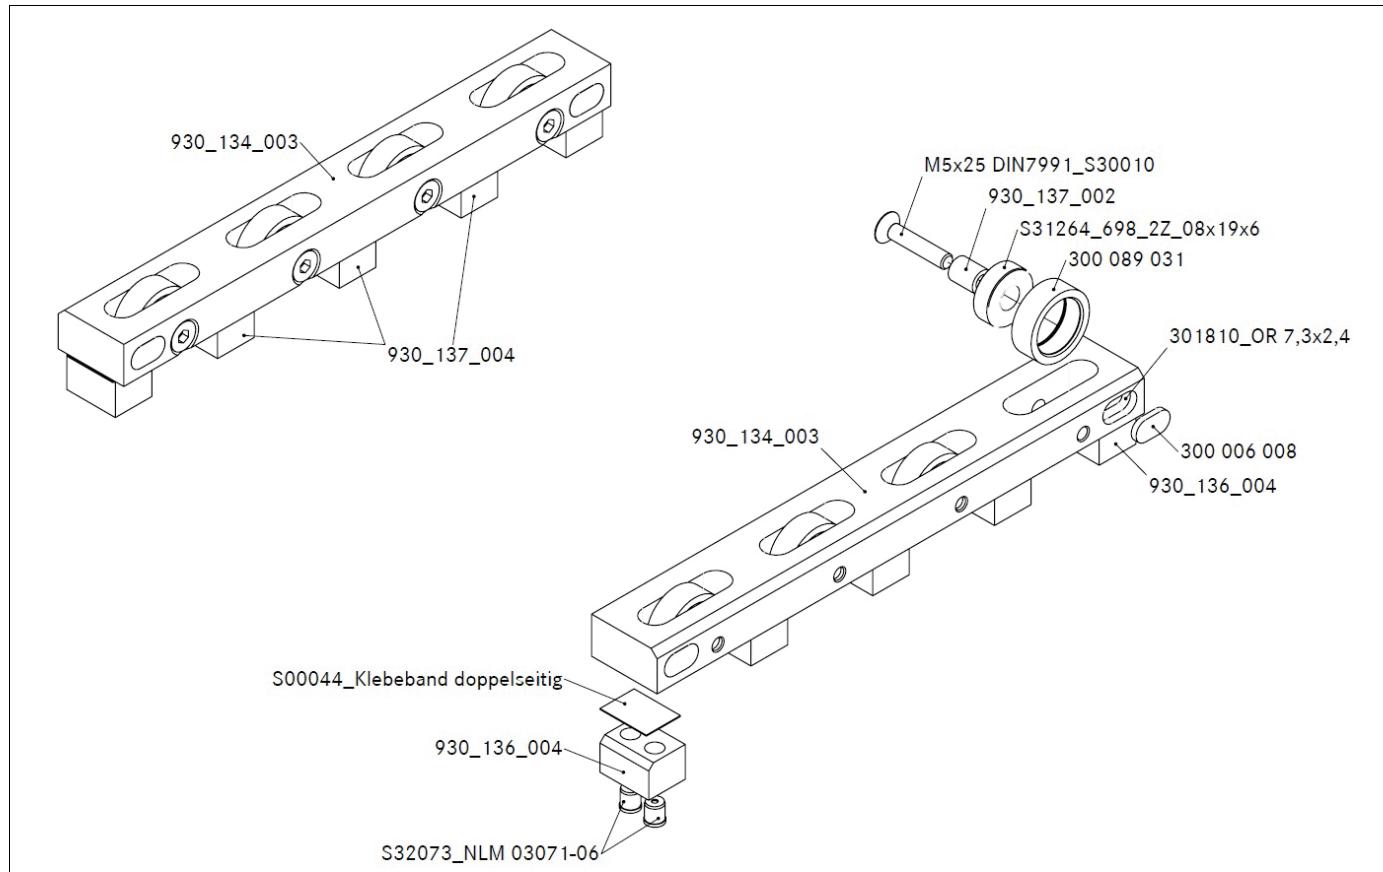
Spring loaded roller bar for ZE/ZED in roller section (UB160 PB160-400)
